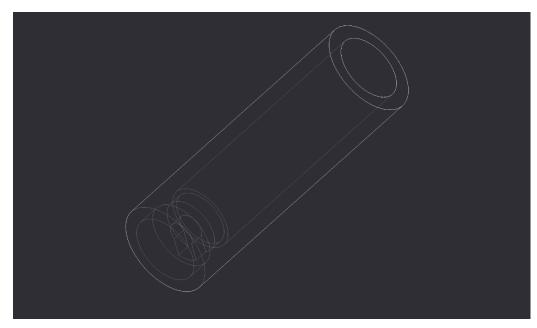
3D exploded view of old motor axis. Extracted from PTC CREO Parametric 5.0.
